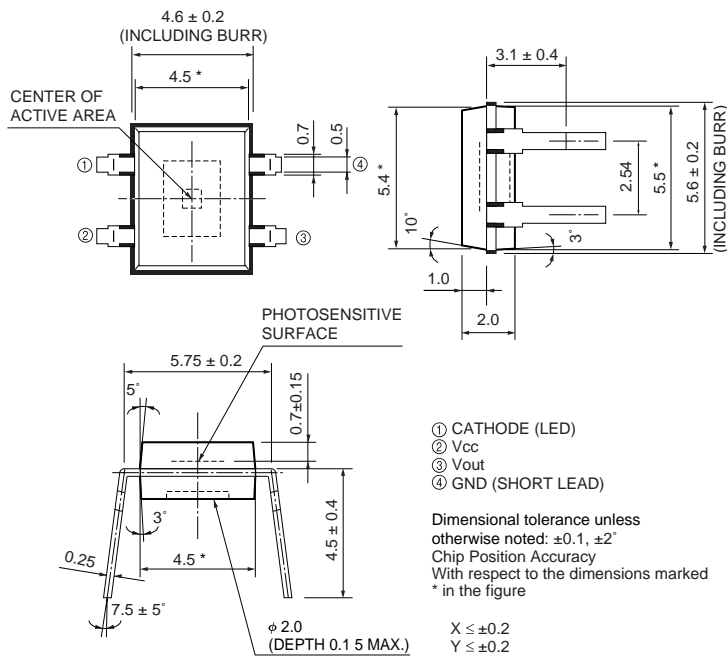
Dimensional Outlines and Connections (Unit: mm)
